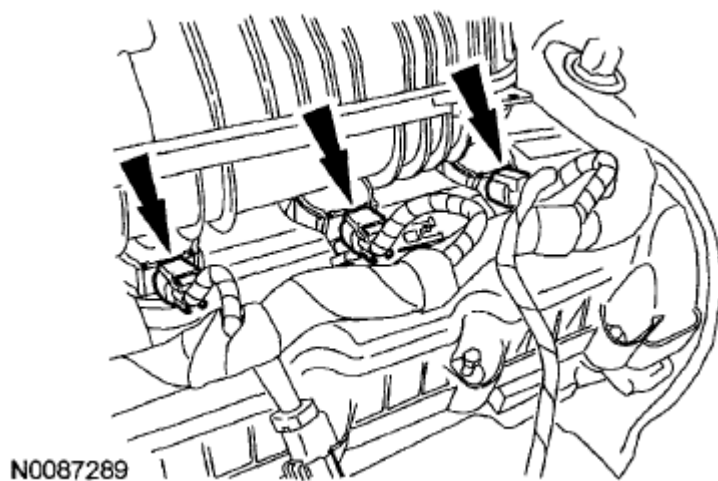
Locating RH Coil-On-Plug Electrical Connectors
